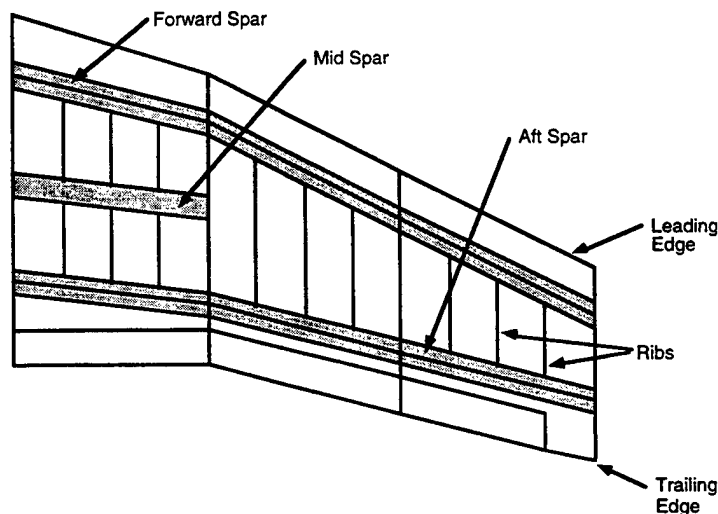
Layout of typical Airbus wing (top view, top skin removed).
